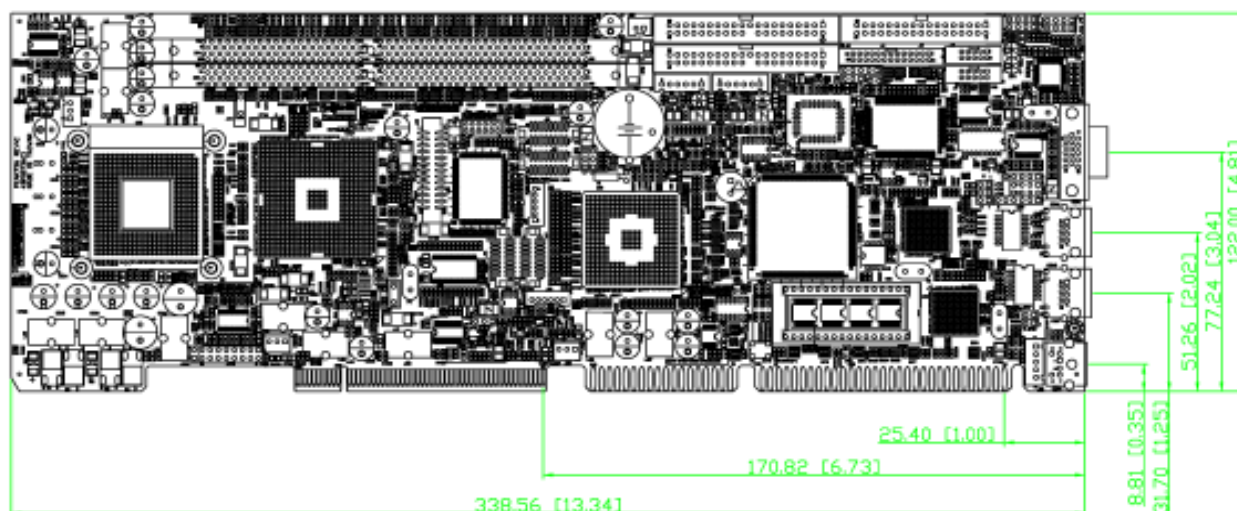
Mechanical Drawing of PEAK 736VL2
